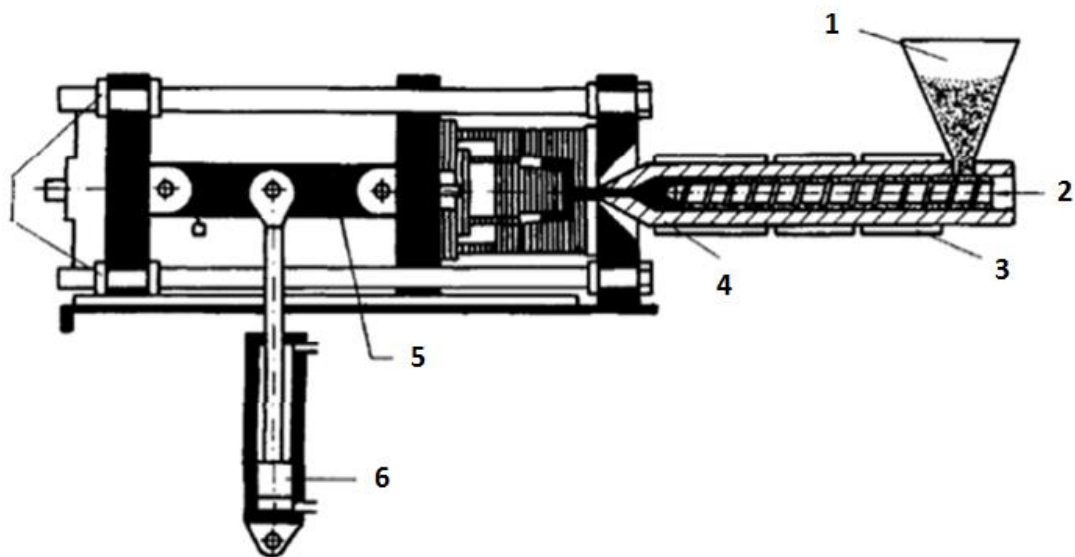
First step Injection (1- hoper / feeding bunker; 2- plasticising area; 3-heating element; 4- nozzle; 5- clamping mechanism; 6- cylinder)
